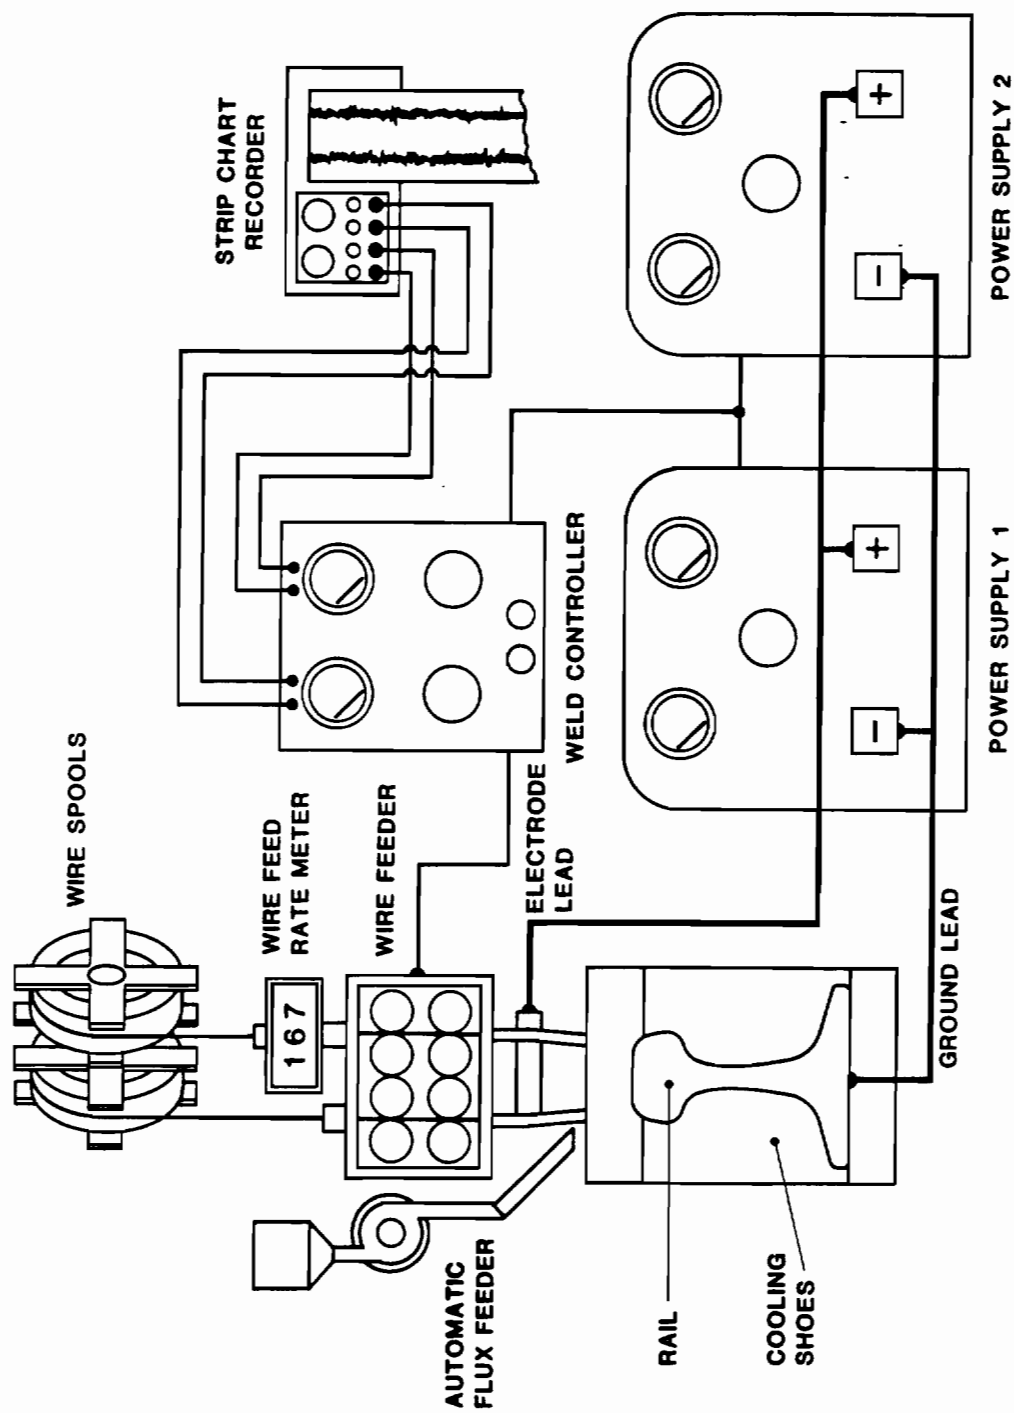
SCHEMATIC ILLUSTRATION OF THE CONSUMABLE GUIDE ELECTROSLAG WELDING SYSTEM USED IN THIS INVESTIGATION.
